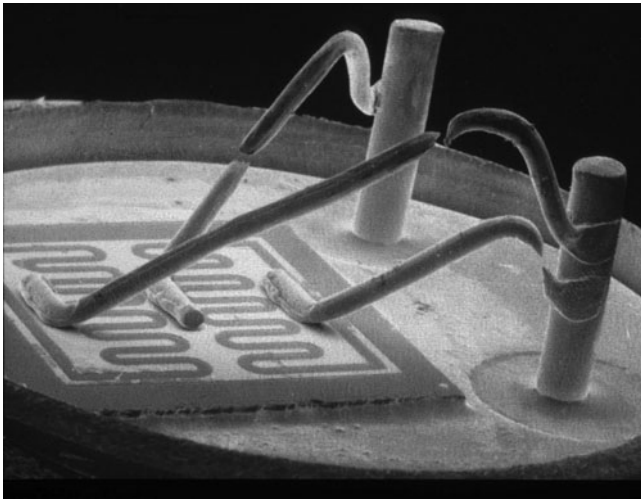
An actual example of wire elongation during pull testing of large diameter (tweezer welded) wire bonds, where the elongation is usually from 15 to 30%. Ductile fractures are shown. These are older devices, but the same wire metallurgy is used today (Chap. 3). As-made, these wires went in approximately a straight line from the chip to the post.
